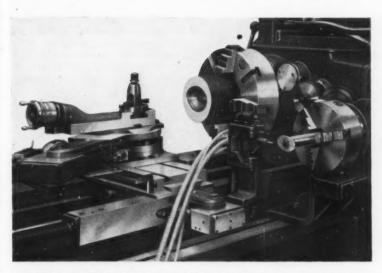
Rear View of the Lathe Showing the Application of a Rotating Master for Producing a Non-circular Form
